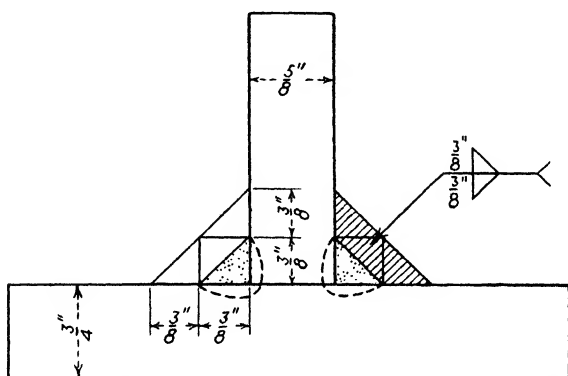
Overwelding is expensive. The dotted area shows the correct size of weld, and the shaded area shows a weld twice as large, according to measurement. The overwelded joint required four times the amount of weld as the correct size and is probably weaker because of extra stress and grain growth in the joint and plates.
